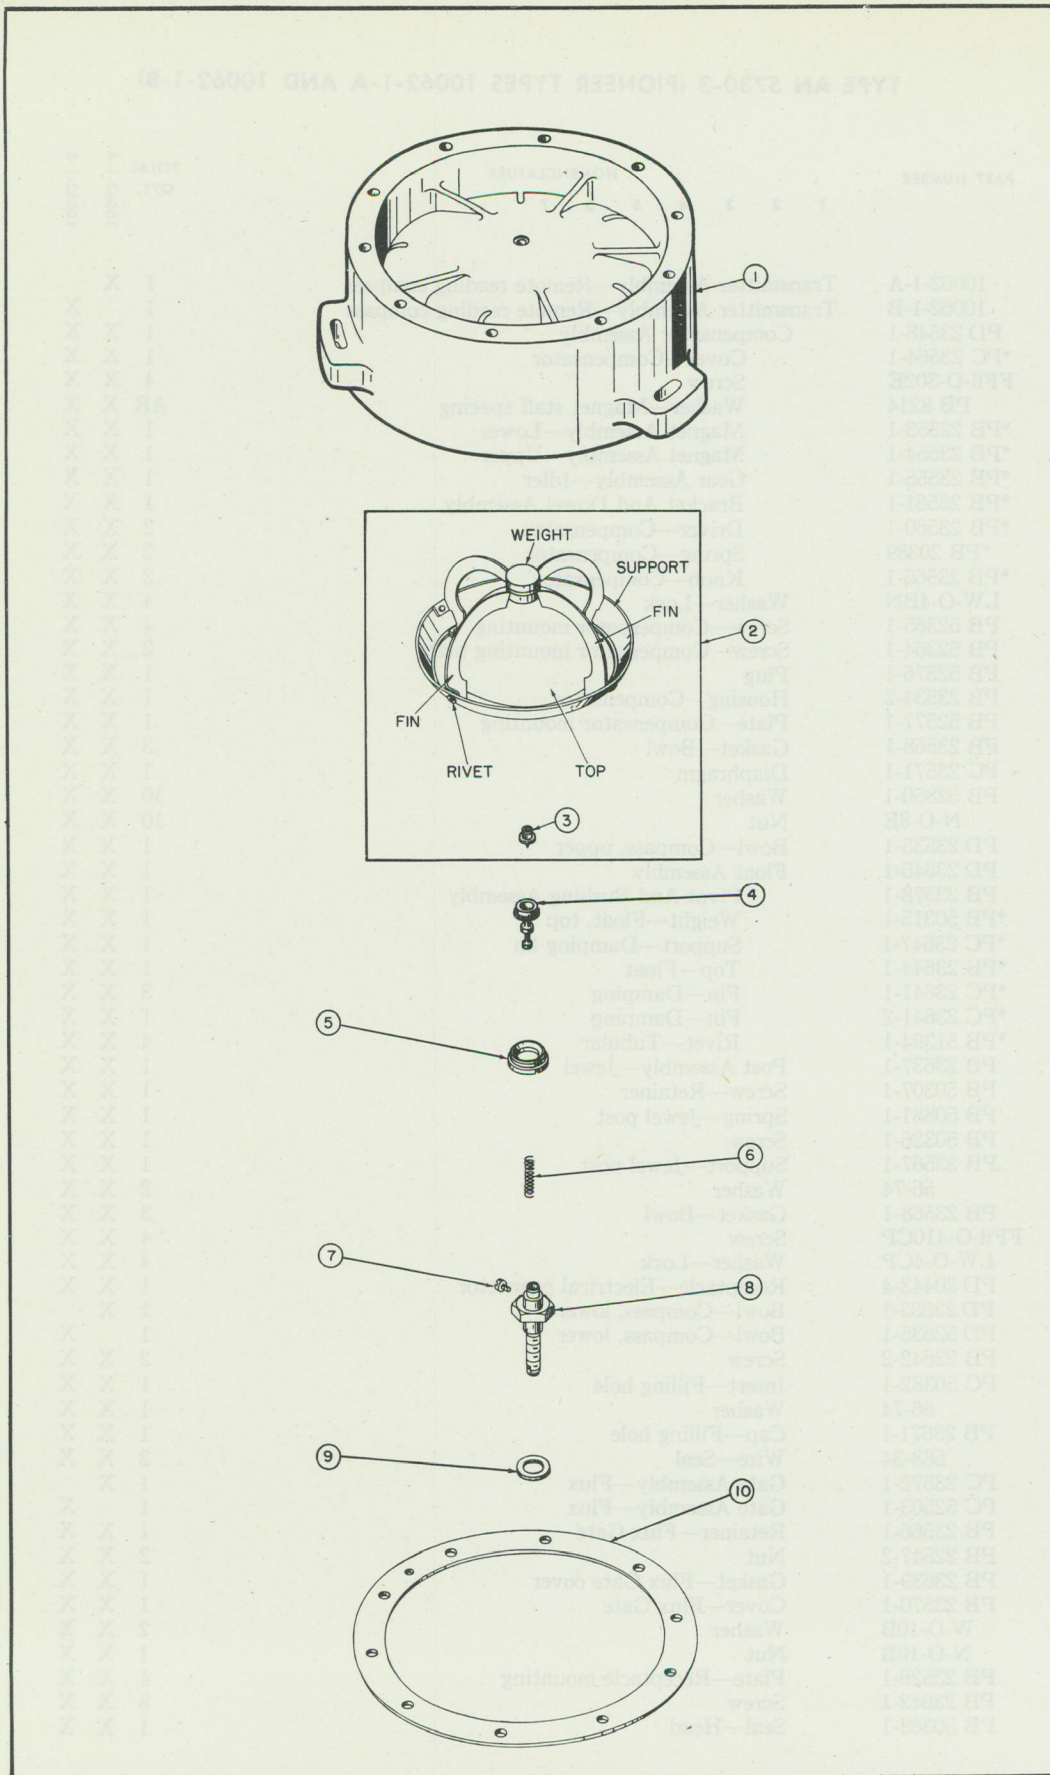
Exploded View Drawing—Main Assembly—Transmitter—Type AN 5730-3
